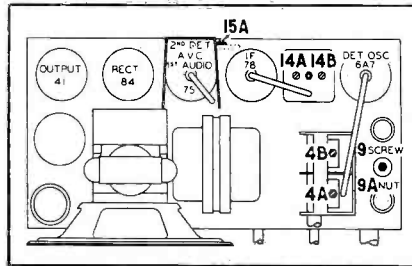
Philco 38-15 (Codes 121, 124) chassis view showing parts and trimmer layout.
